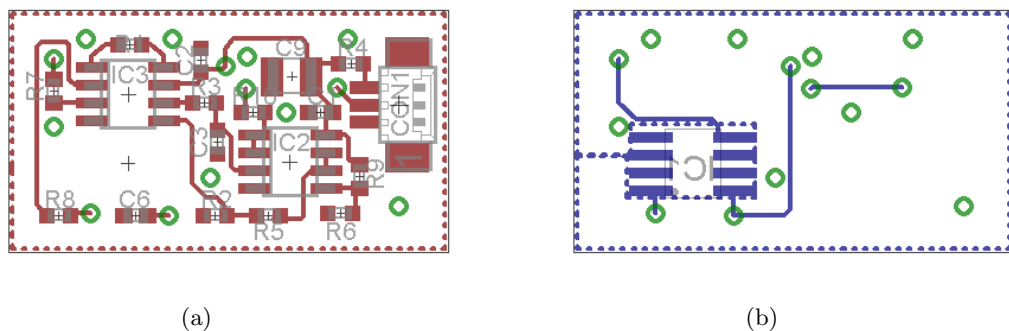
(a) Top side and (b) bottom side of GMR PCB.
